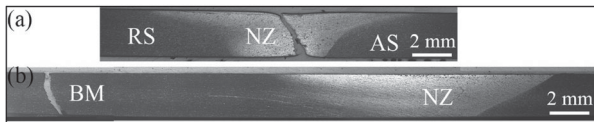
Fractured samples of FSW joints: (a) A-200 sample, (b) W-200 sample.
